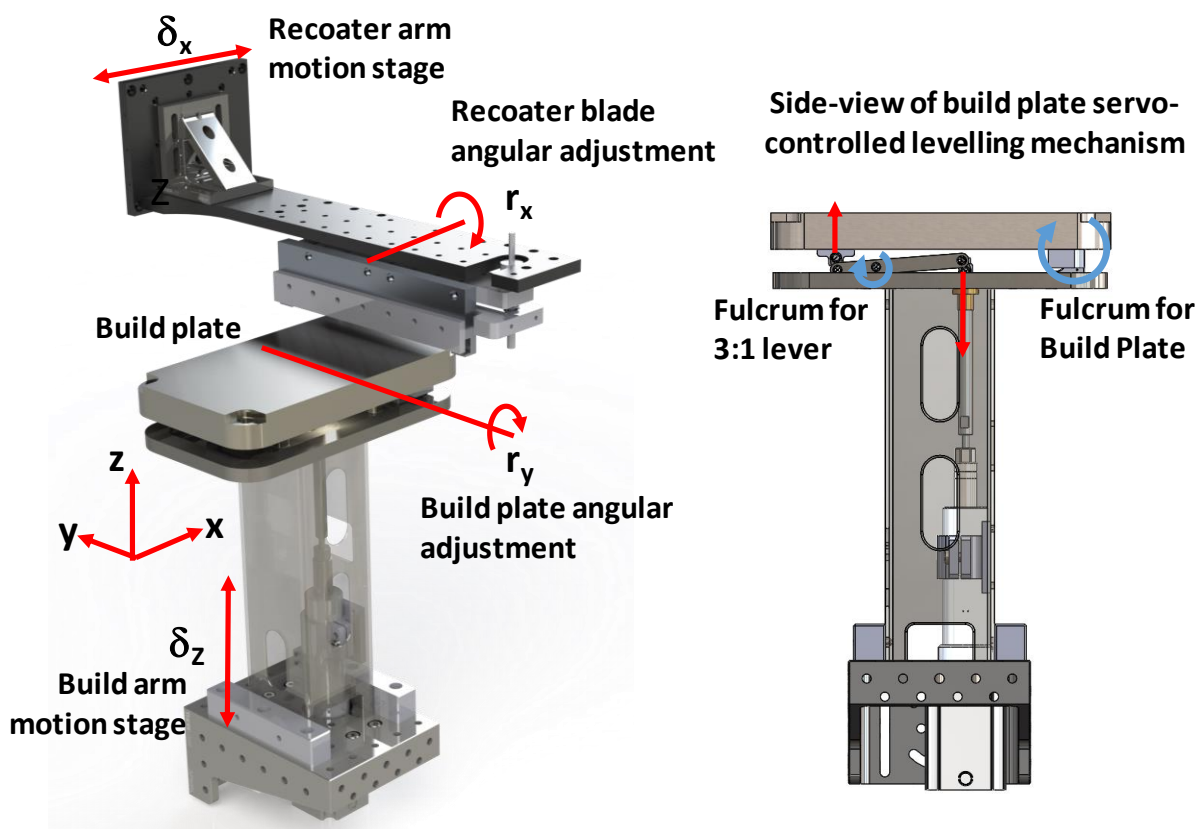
Left: Build plane and recoater plane parallelization adjustment coordinates. Note that some stiffening brackets and the outrigger ball rail connection are not shown. Right: Cutaway view of build arm showing internal linkage assembly for the automated build plate adjustment. An actuated pushrod rotates a 3:1 lever arm, which rotates the build plate's free edge about a pivot bearing fulcrum.
